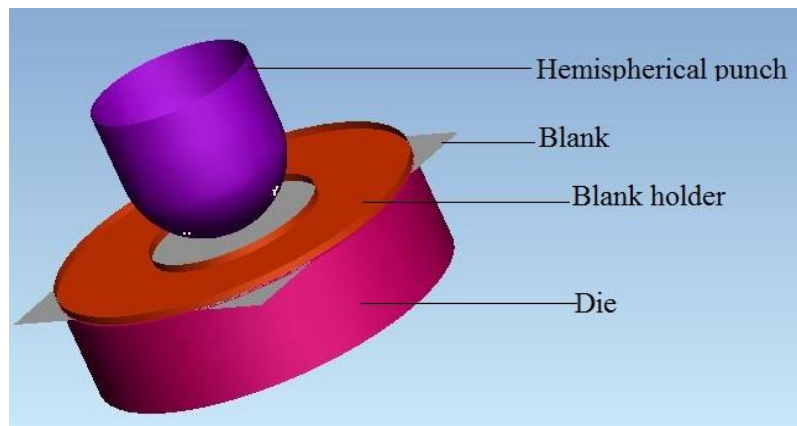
Assembly of LDH setup in PAM STAMP 2G with blanks
